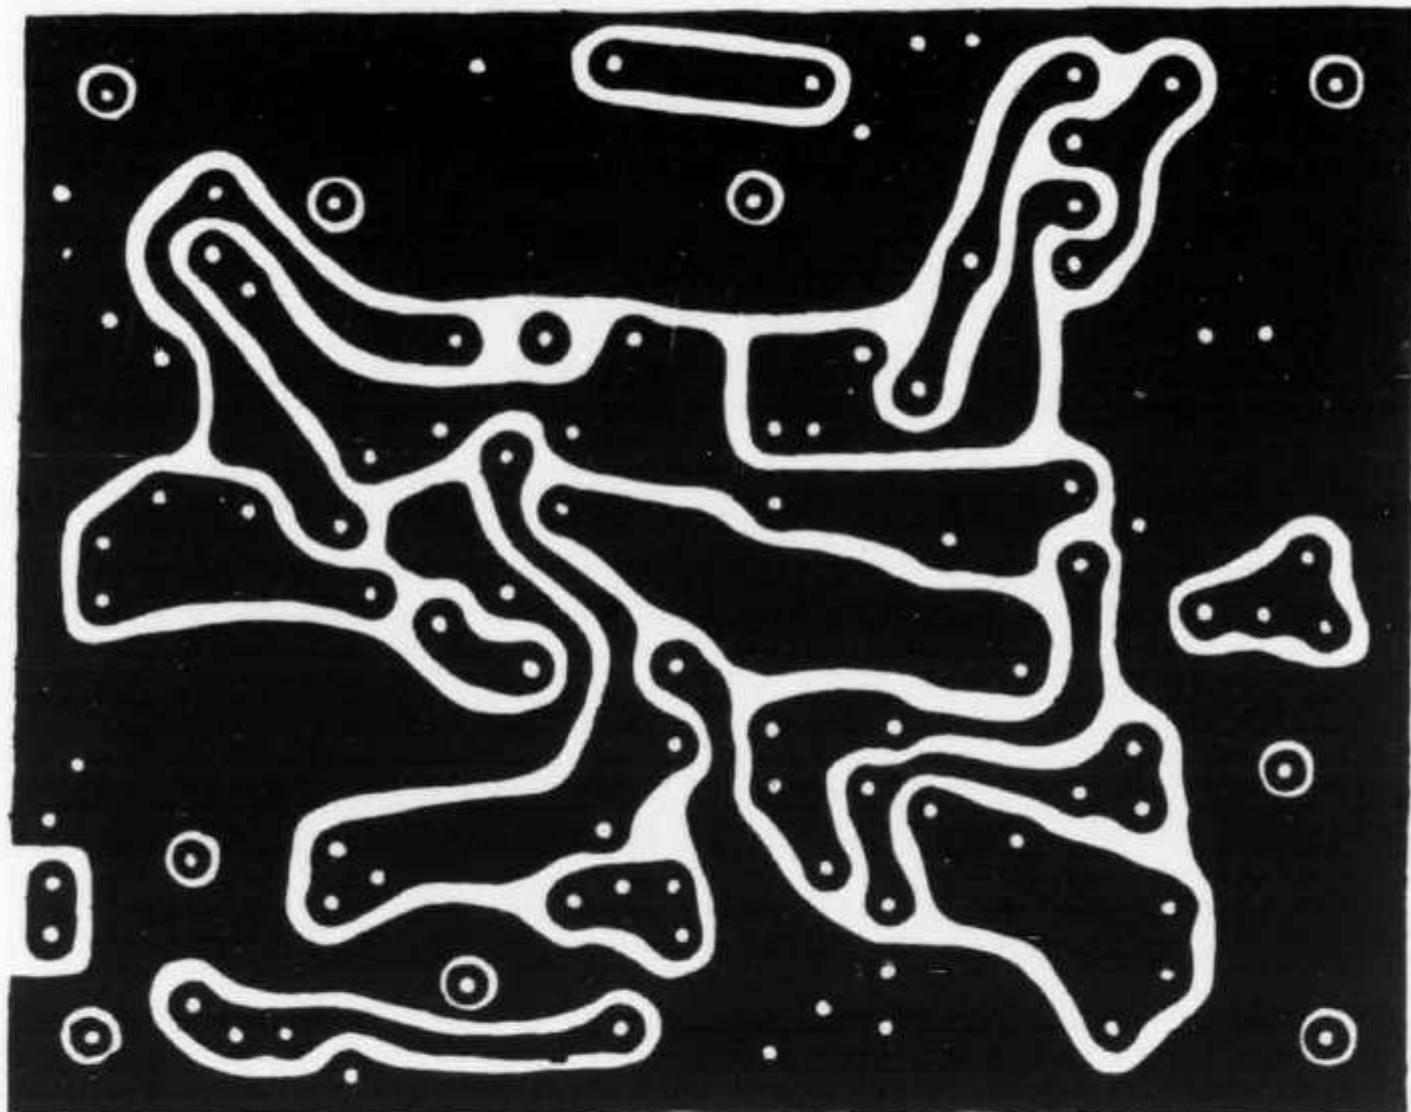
Double-size PC board layout for the rf/af section of the receiver.
